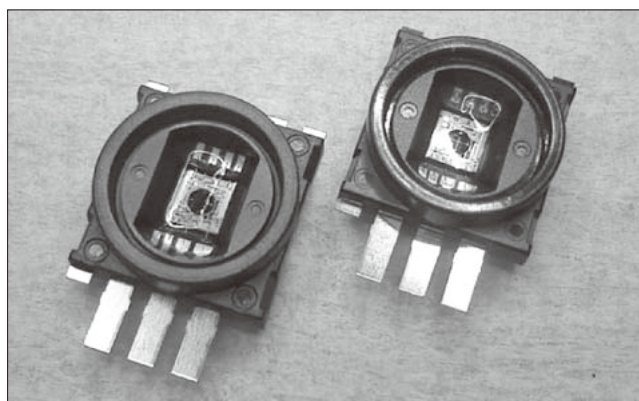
Corrosion resistant structure of sensor chip electrode pads
